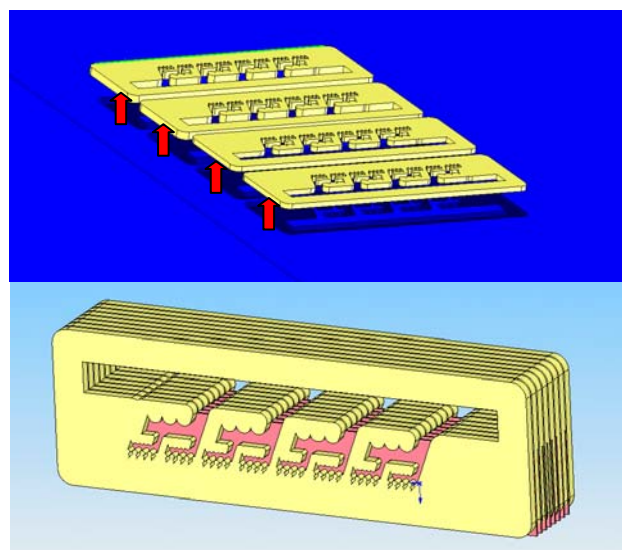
Mold SDM. Cast and machined urethane frames (top) are assembled with polyethylene spacers to create a complete mold (bottom).
